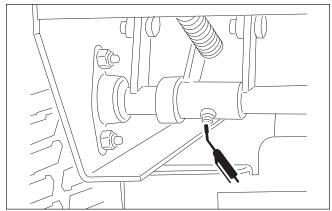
Brake Link Pivot (rear shield removed for clarity)
